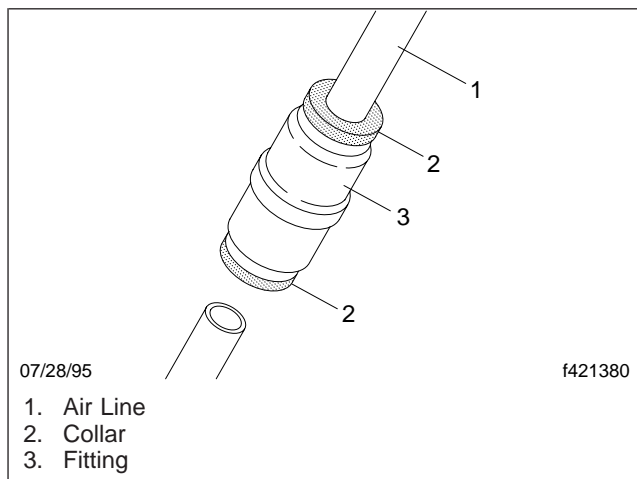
, Nylon Air Line and Quick-Disconnect Fitting
